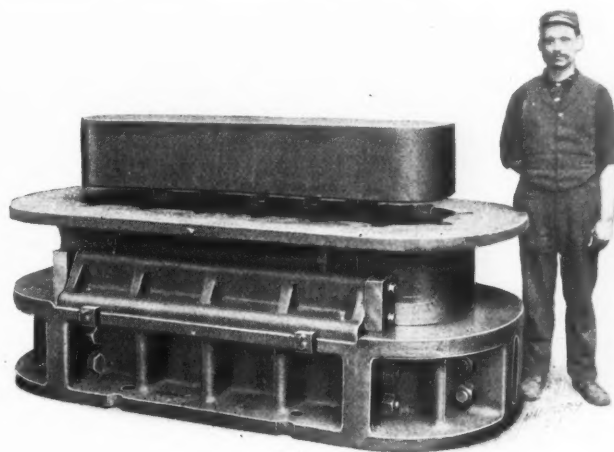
One of the Drawing Dies used in the Press shown in Fig. 1.
